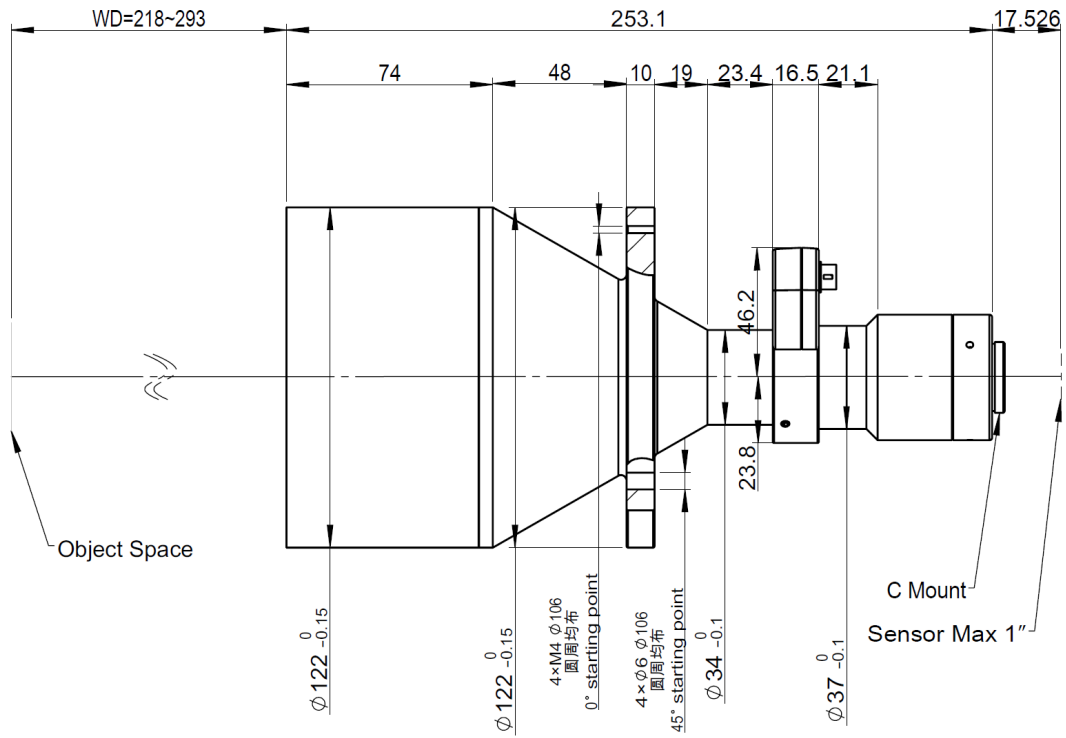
Mechanical drawing of the DTLP-1-0166-258 (unit: mm).
